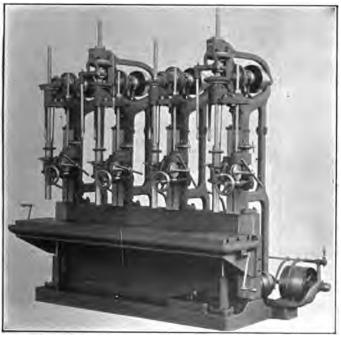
Four spindle gang drilling machine with rear shaft drive. Two spindles are equipped with reversing attachment. (Courtesy Cincinnati-Bickford Tool Co.)
